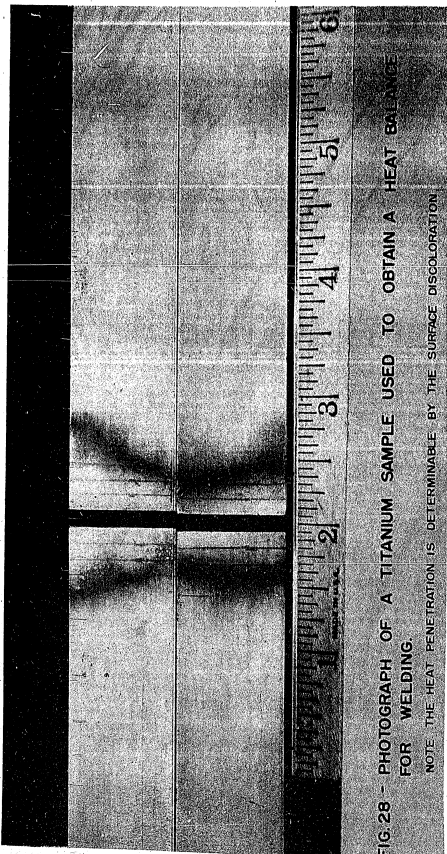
PHOTOGRAPH OF A TITANIUM SAMPLE USED TO OBTAIN A HEAT BALANCE FOR WELDING
